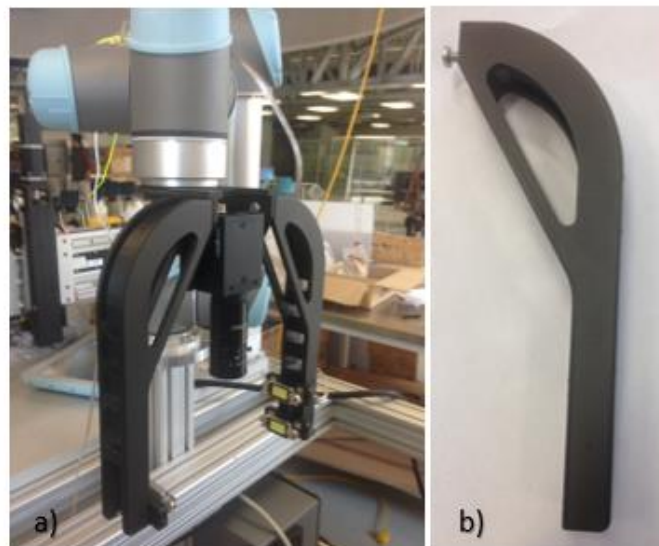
Smart Vision System a) Final Assembly b) Printed bracket
